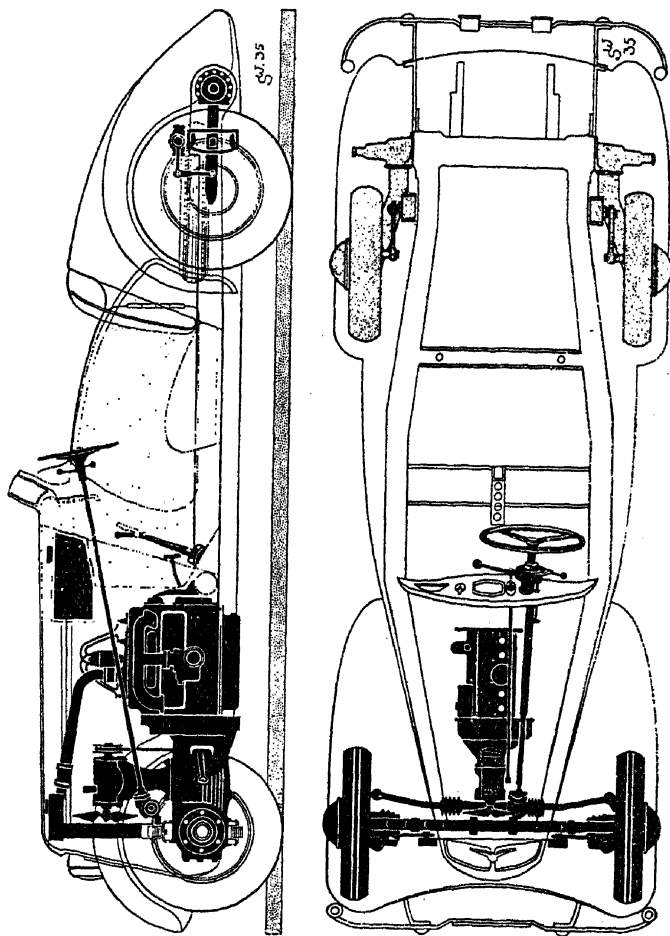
Adler Front Drive Car with Rear Torsion Bar Springing.
